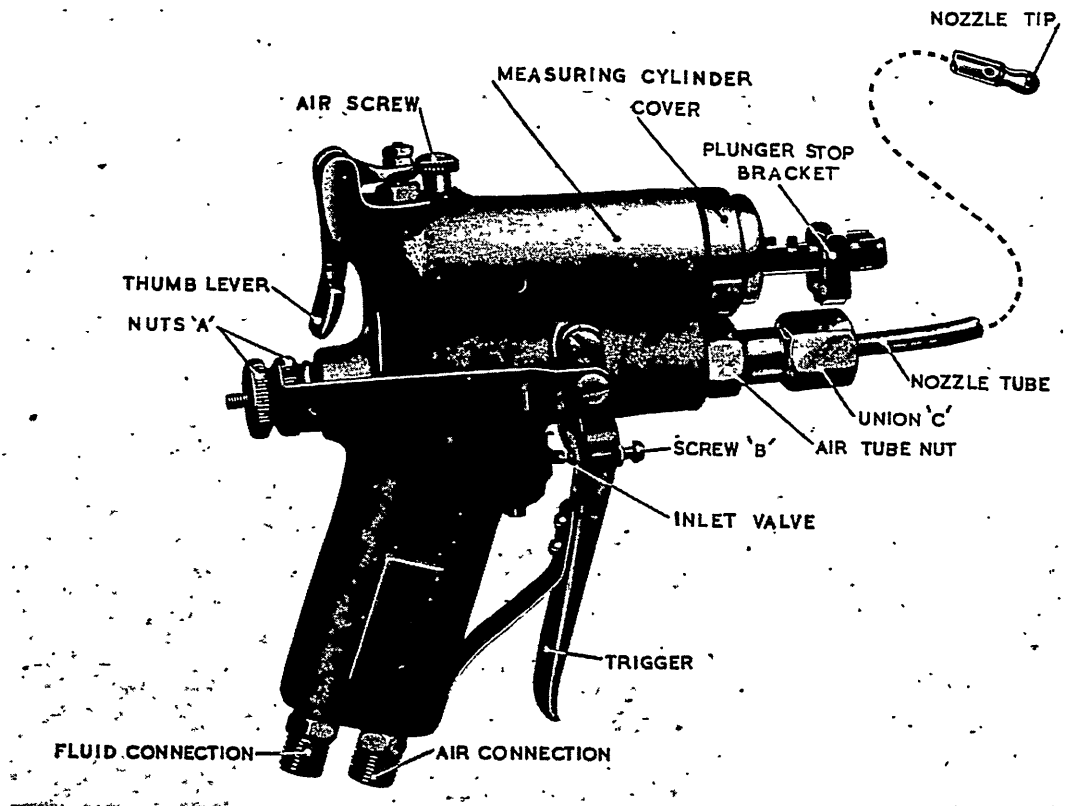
Miller Type C.S.101 corrosion inhibitor spray gun
